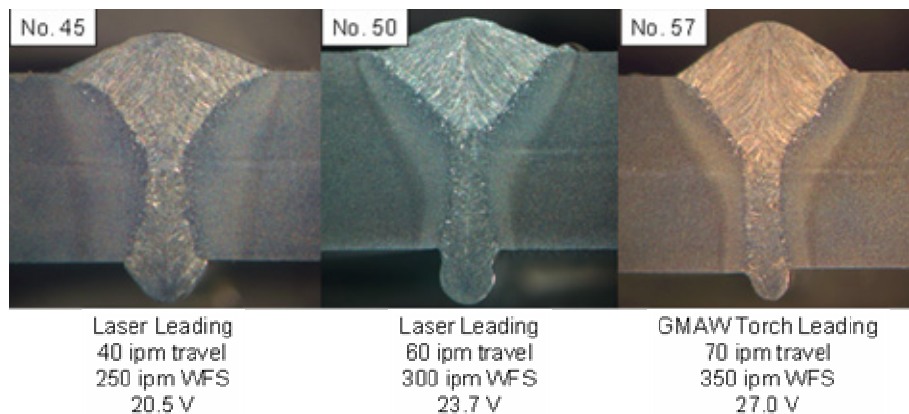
Full penetration welds achieved at a variety of optimized processing conditions in 0.25 inch thick steel plate.
